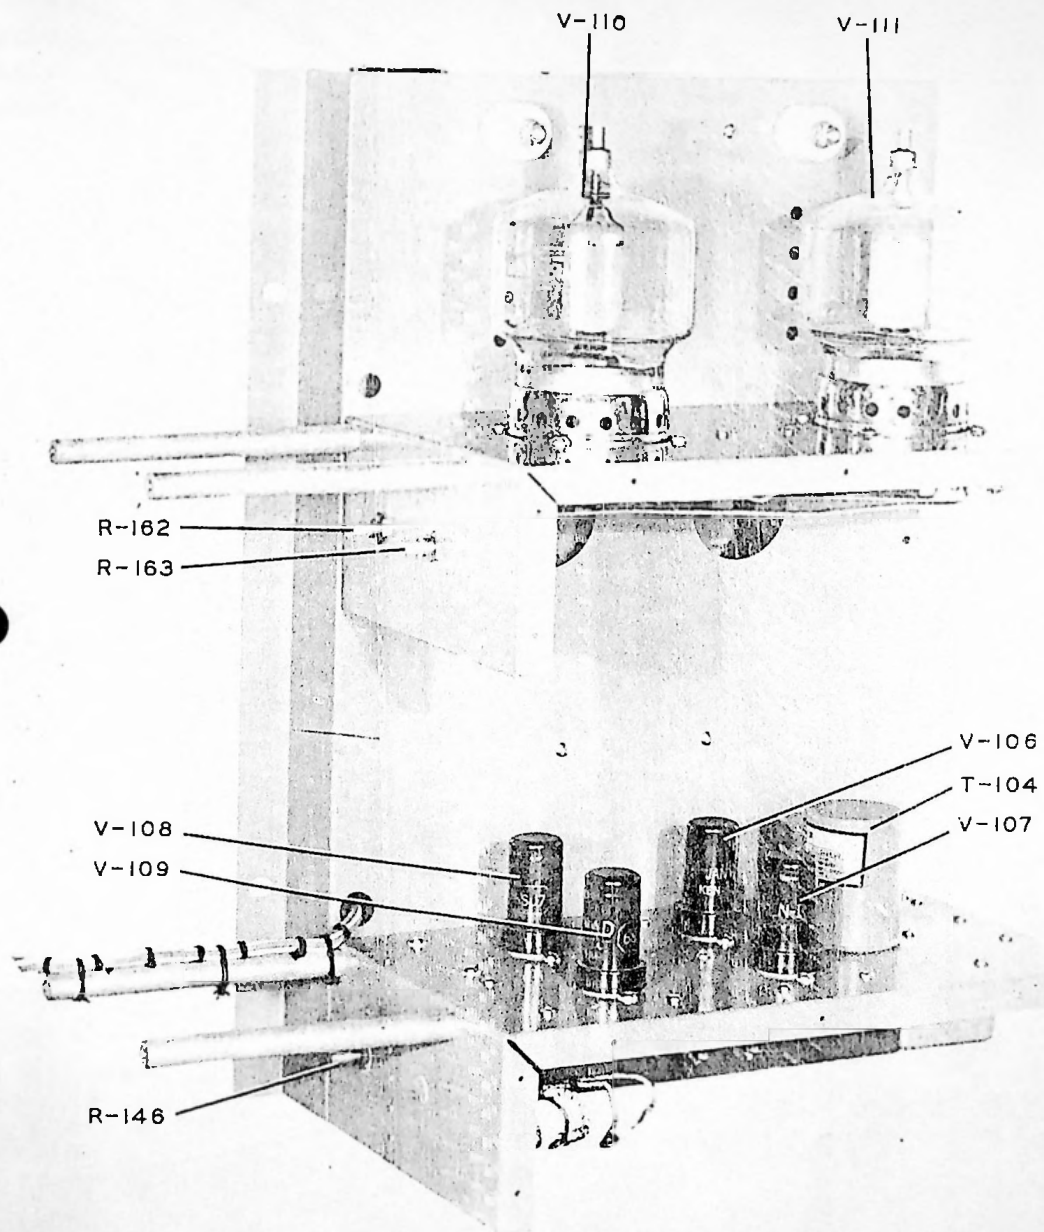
Audio Chassis Parts Arrangement, Top View
